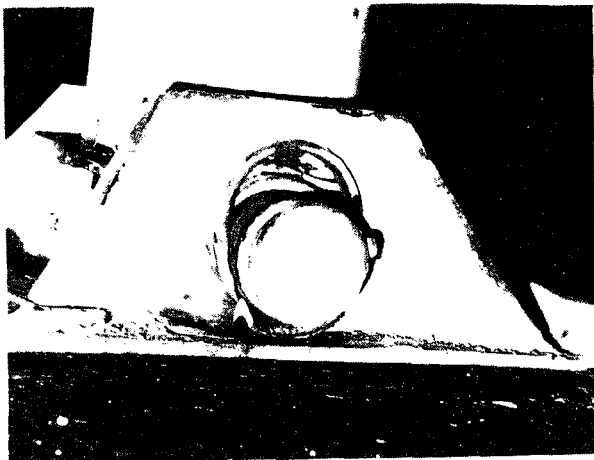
DAMAGE TO TRAILER SUPPORT FOOT AFTER SIXTH TEST RUN
